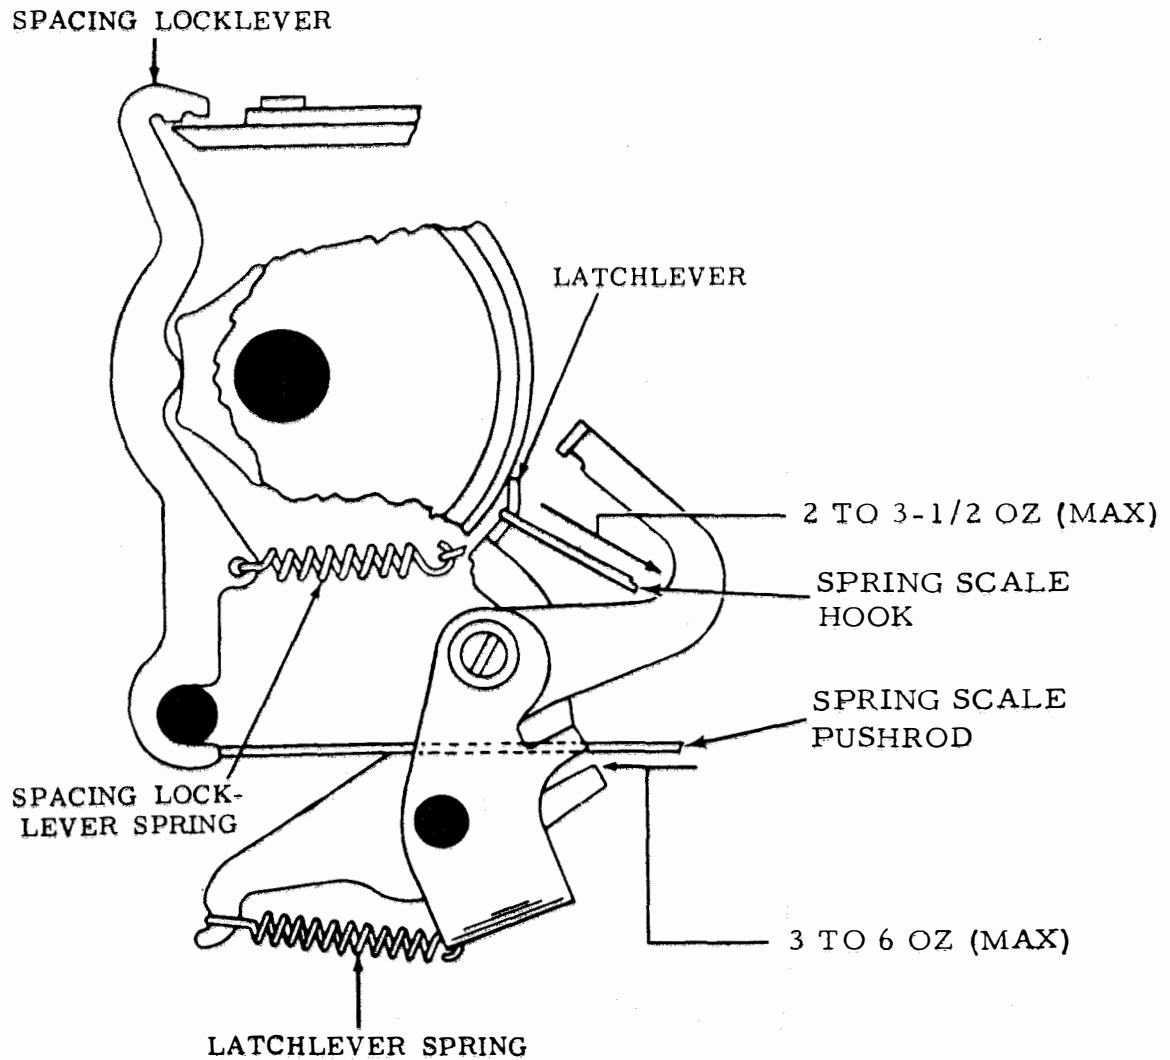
Selector Clutch Latchlever Spring and Spacing Locklever Spring, Right Side View
